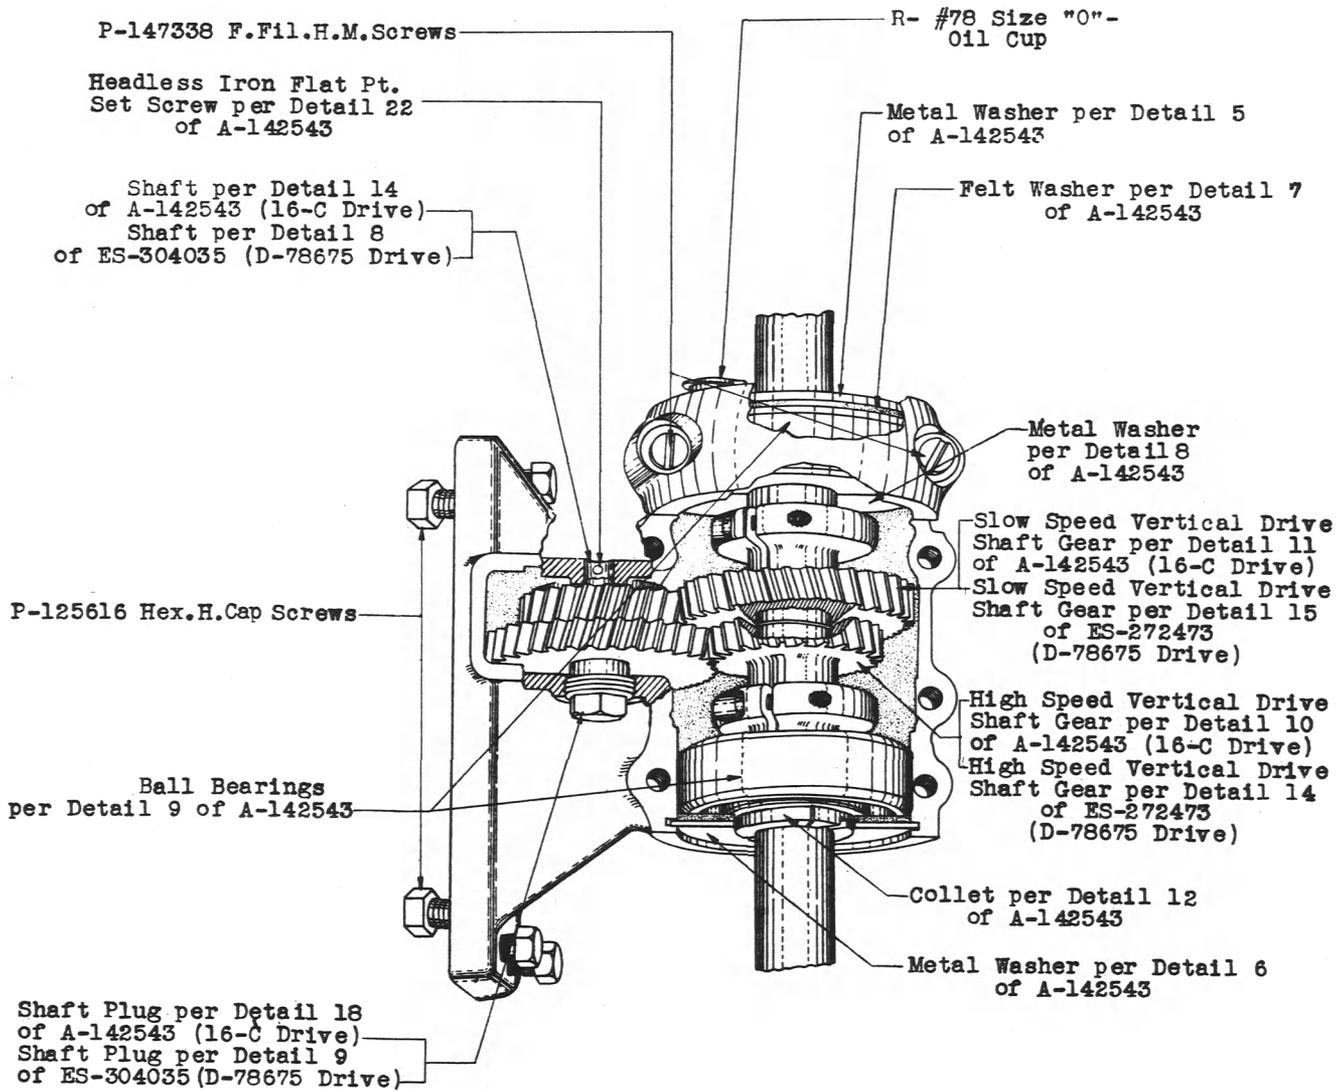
Assembly of 16-C and D-78675 Drives Without Gear Housing Cover
